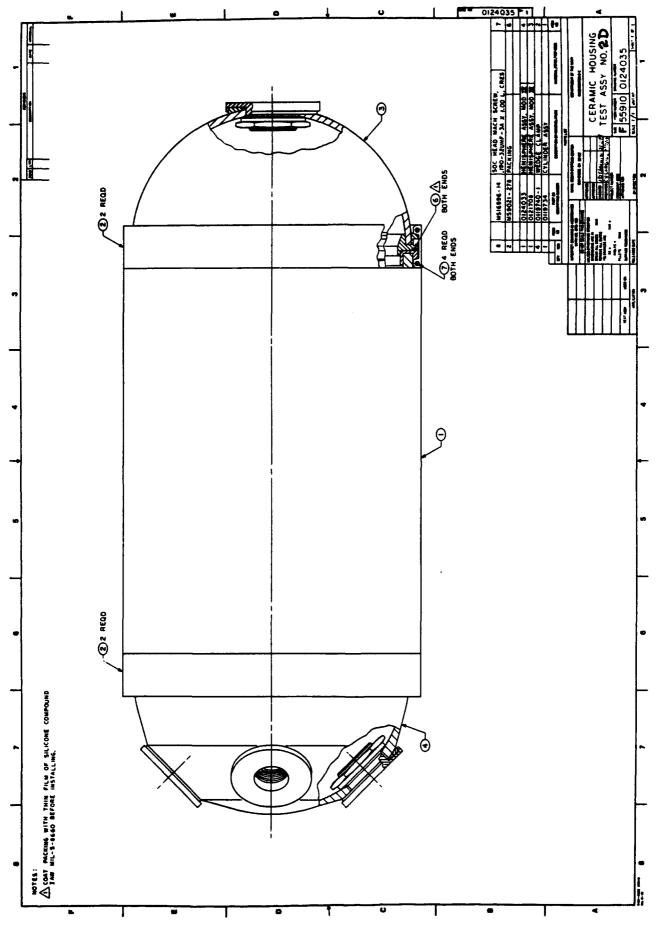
Ceramic housing test assembly 2D incorporating the Mod 4 ceramic builthead.
